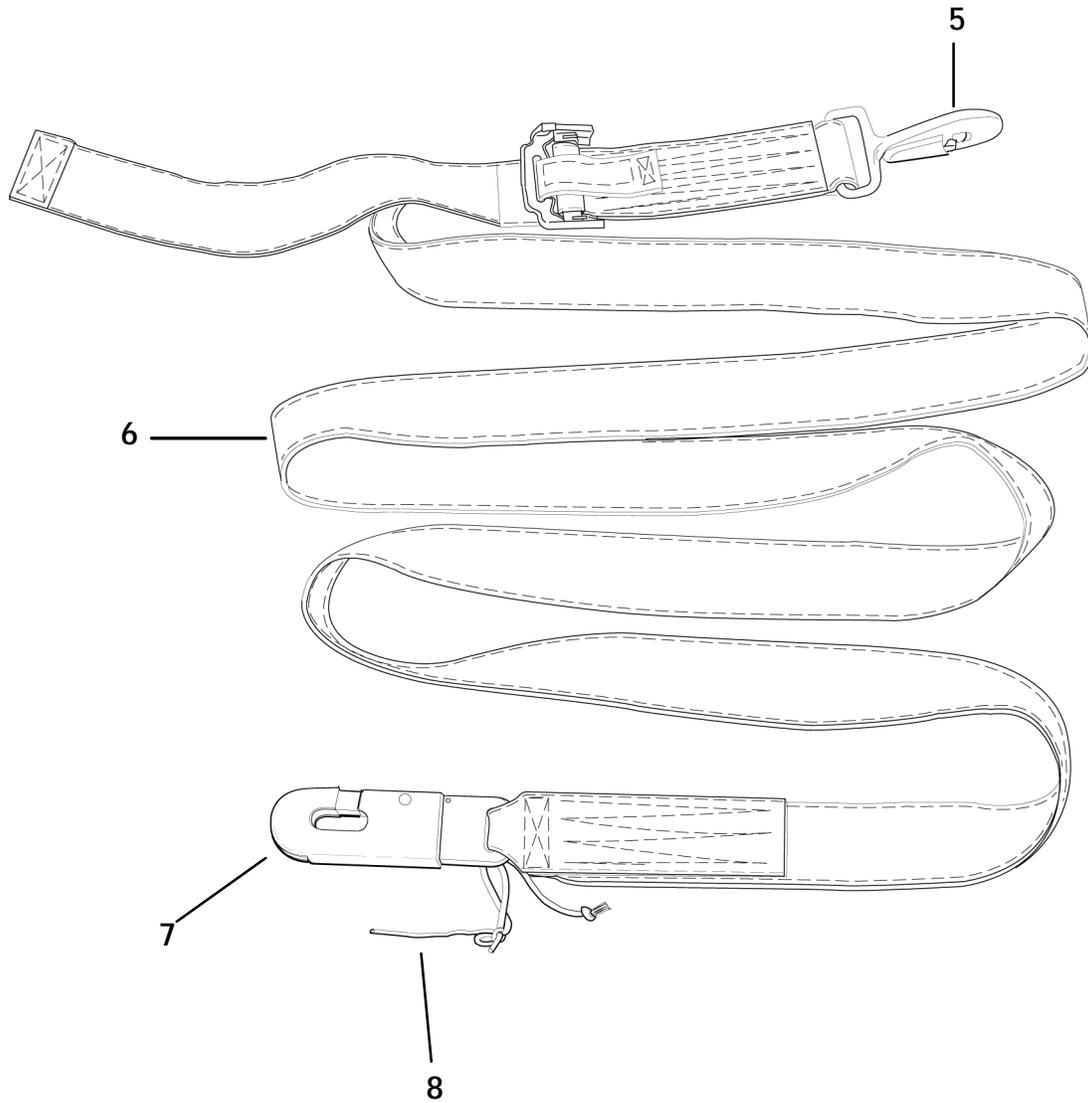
Aircraft Safety Harness Assembly (Sheet 2 of 3)
